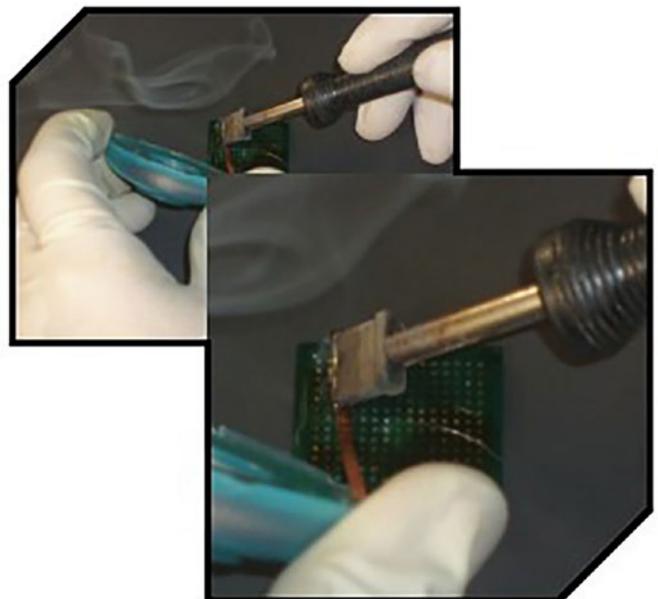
Solder wick being used to remove remnant solder prior to reballing BGA.
